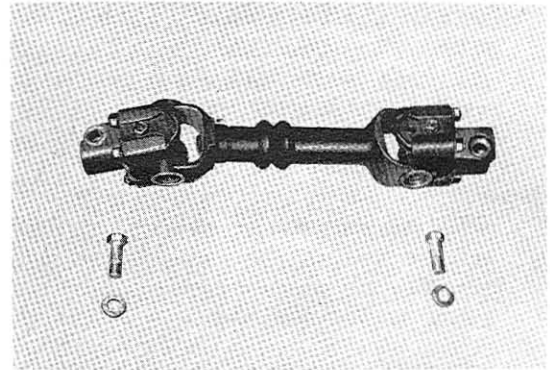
Inter-mediate Shaft V5154 Assembly
